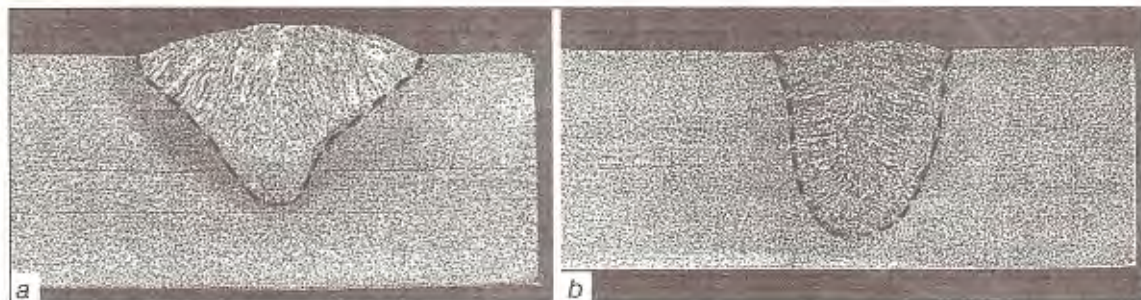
Macrosections of deposited metal in single-arc (a) and pulsed twin-arc (b) welding (09G2S steel, $\delta = 12$ mm; for mode parameters see the text)
